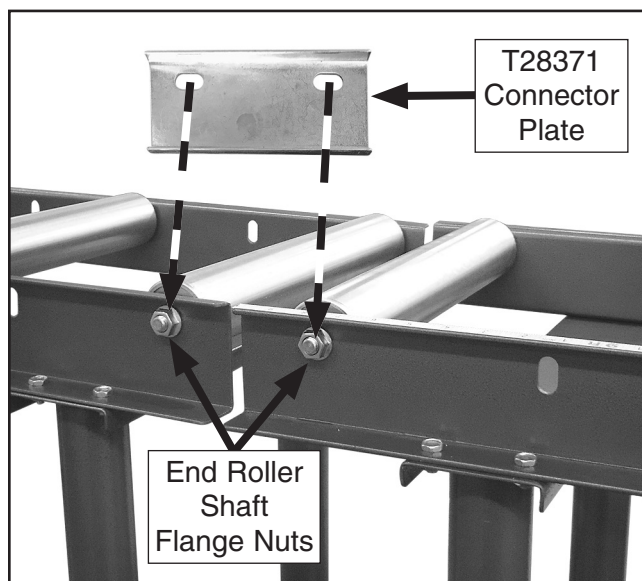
Placing roller tables end to end to connect T28371 Connector Plate.
